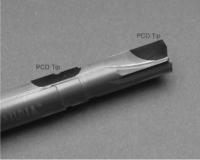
Typical cutting tools with PCD tips on the cutting edges.
